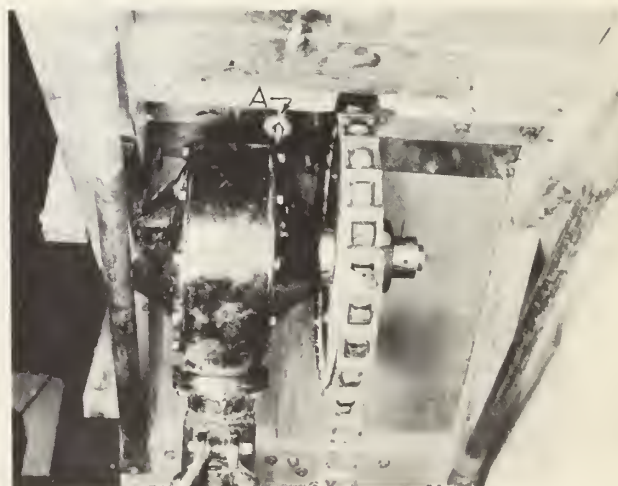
Rear view of countershaft in place. Eyebolt A, for tightening chain, is attached to an ear bolted to the side of the differential housing.
